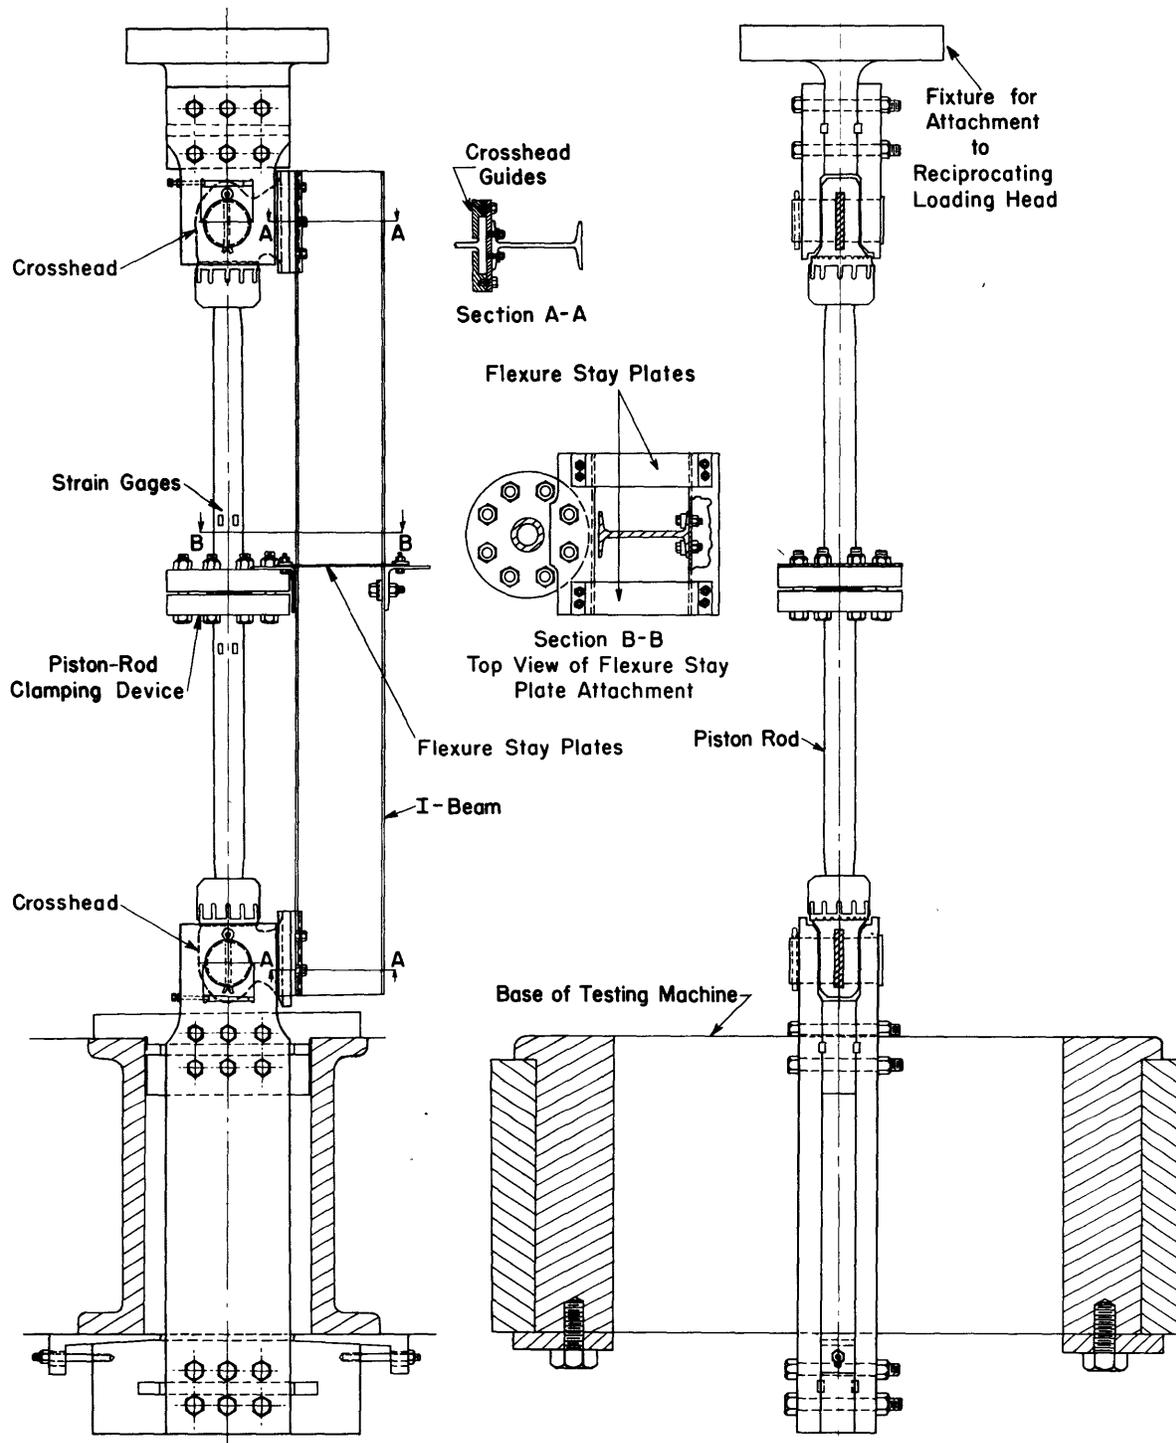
Sketch of Rig for Testing Rods in Alternating-Load Testing Machine
